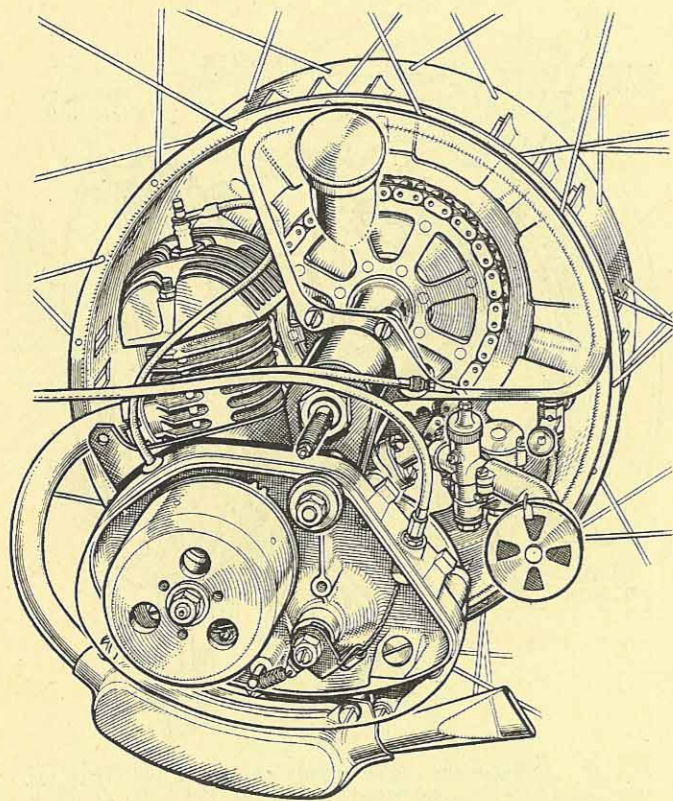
Of 25.7 c.c. engine capacity, the Cyclomaster is sold as a complete rear wheel. The engine is contained within an open-sided drum, which forms the wheel hub and is provided with louvres designed to assist cooling by directing air on to the engine. In unit with the engine is a single-plate, cork-insert clutch running in oil. Primary and final drives are by chain. A notable feature of the engine is that the inlet port is controlled, not by the piston, but by a crankshaft-driven rotary valve—illustrated on page 33
